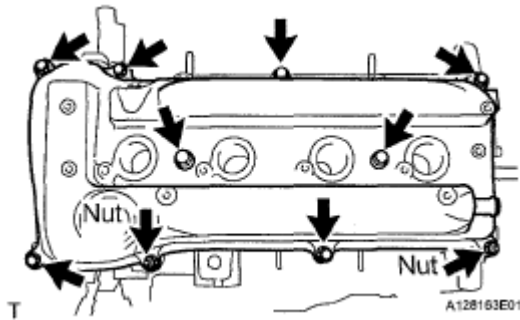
Locating Bolts, Nuts And Cylinder Head Cover
